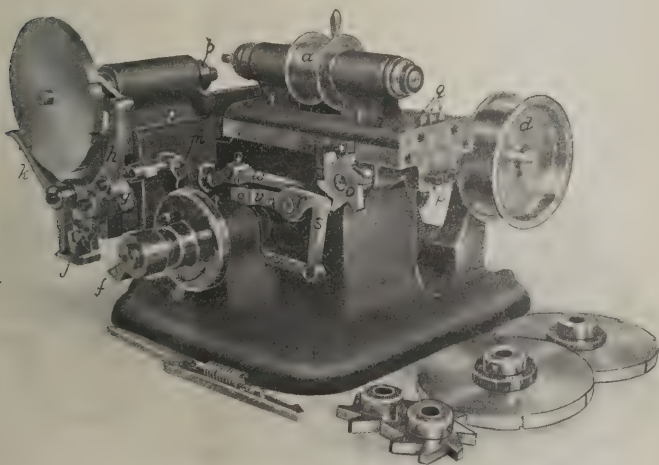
Side View showing Indexing and Feeding Movement of Pinion Cutter.
